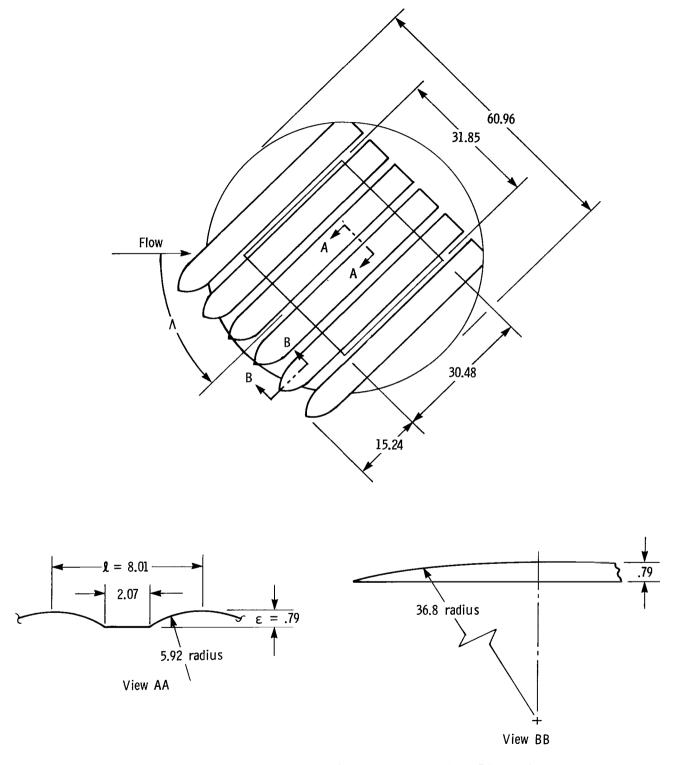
Details of corrugated surface model. Dimensions are given in centimeters.
